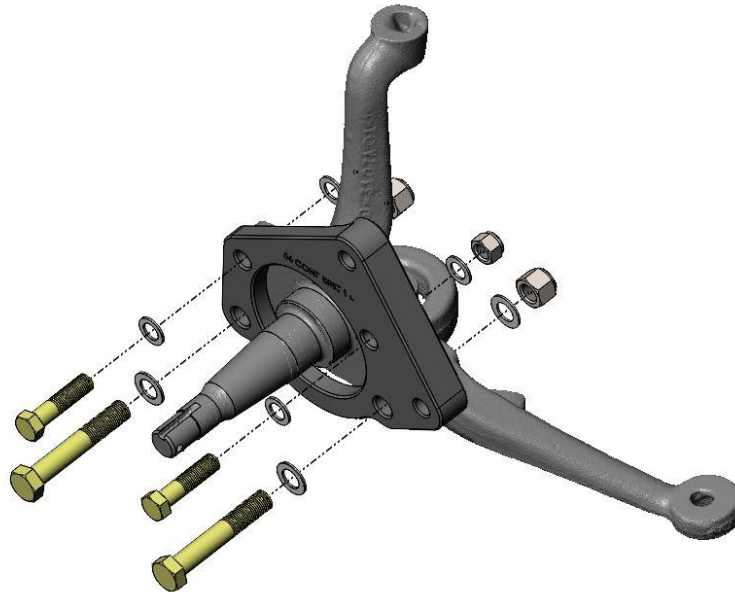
Primary Caliper Bracket Installation (LH Side Shown)
